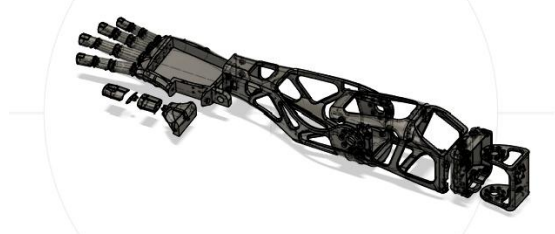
CAD model of the 3D-printed robotic arm assembly.
